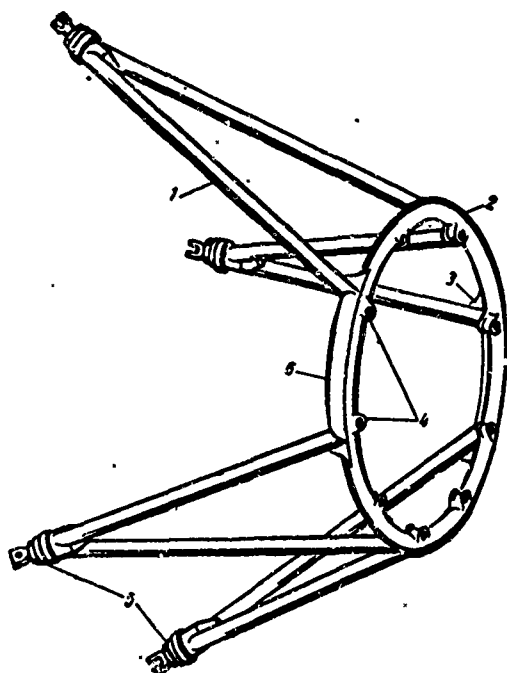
Engine mount; 1 - struts; 2 - ring; 3 - knee plate; 4 - engine mounting lugs; 5 - mounting lugs of mount to the fuselage; 6 - reinforcing plate.
